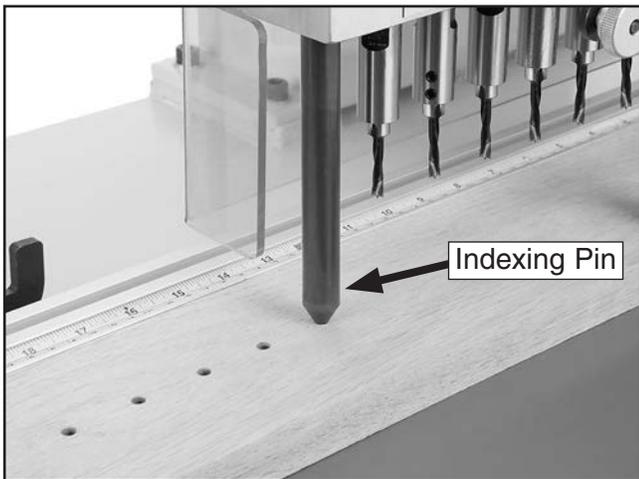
Using the indexing pin to position workpiece for additional drilling (boring head guard removed for photo clarity).
